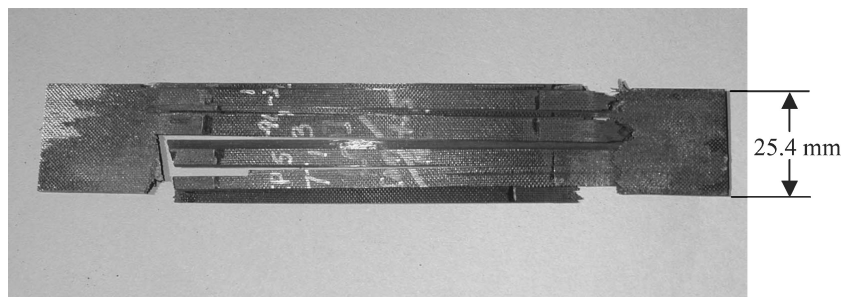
Fracture surface of $[0]_{12}$ laminate after tensile test at room temperature.
